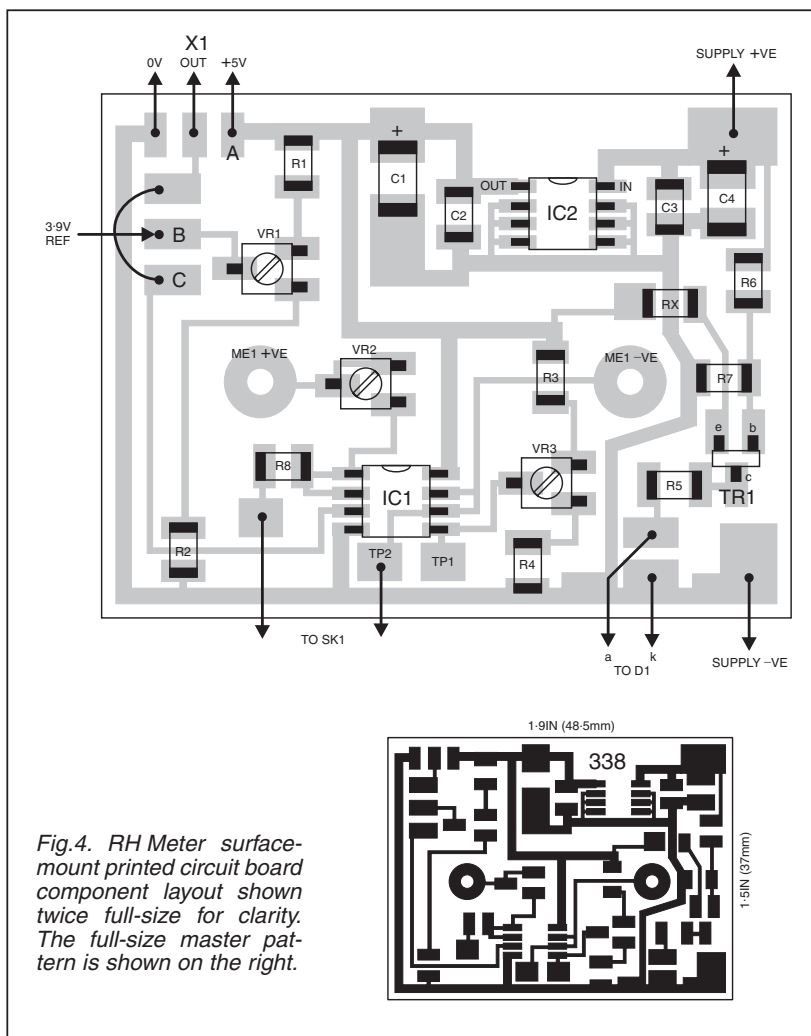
RH Meter surface-mount printed circuit board component layout shown twice full-size for clarity. The full-size master pattern is shown on the right.
